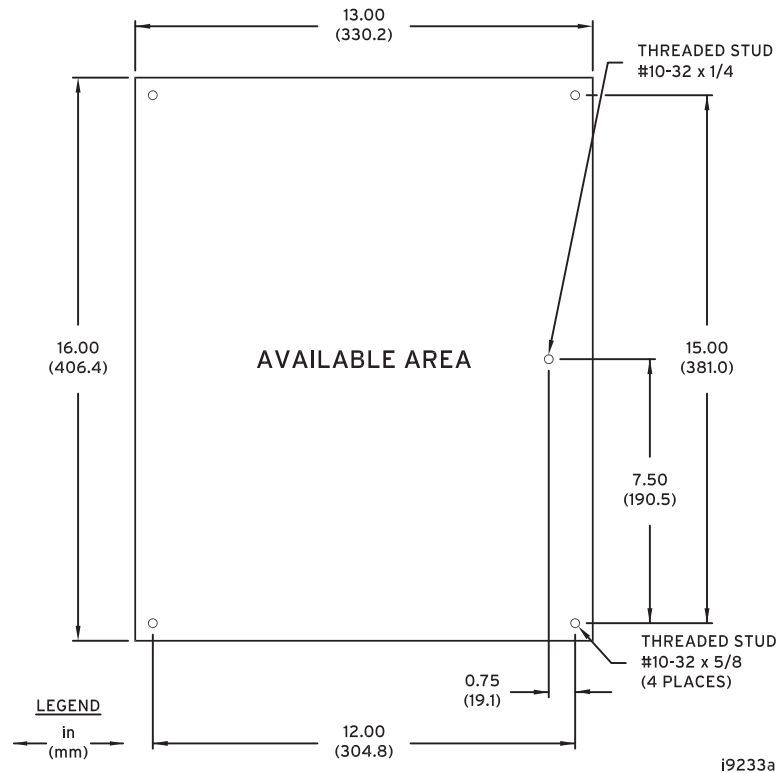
Recommended Dimensions and Drill Plan for User-Supplied Accessory Panel (Swing Open Enclosure)
